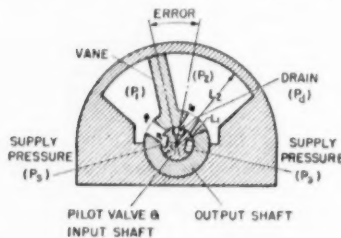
(b) ROTARY HYDRAULIC SERVMOTOR
